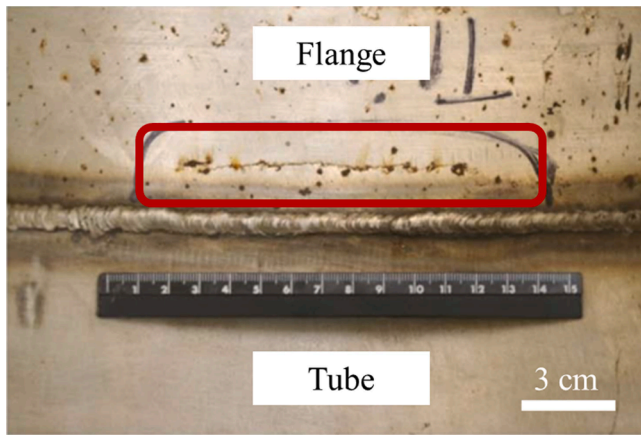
Severe pitting corrosion observed on the internal side of the SDSS flange near the flange and tube connection, highlighted by the red rectangle⁶ (adapted from Tavares et al., 2018).
